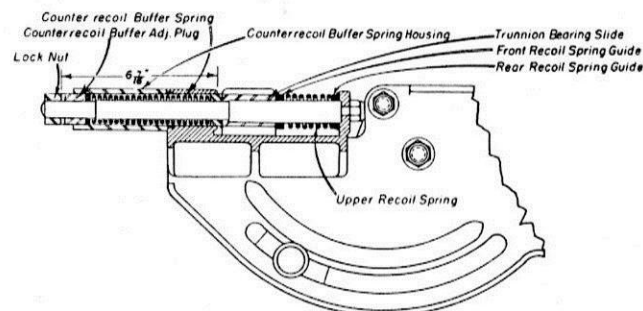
Upper recoil and counterrecoil mechanism.
